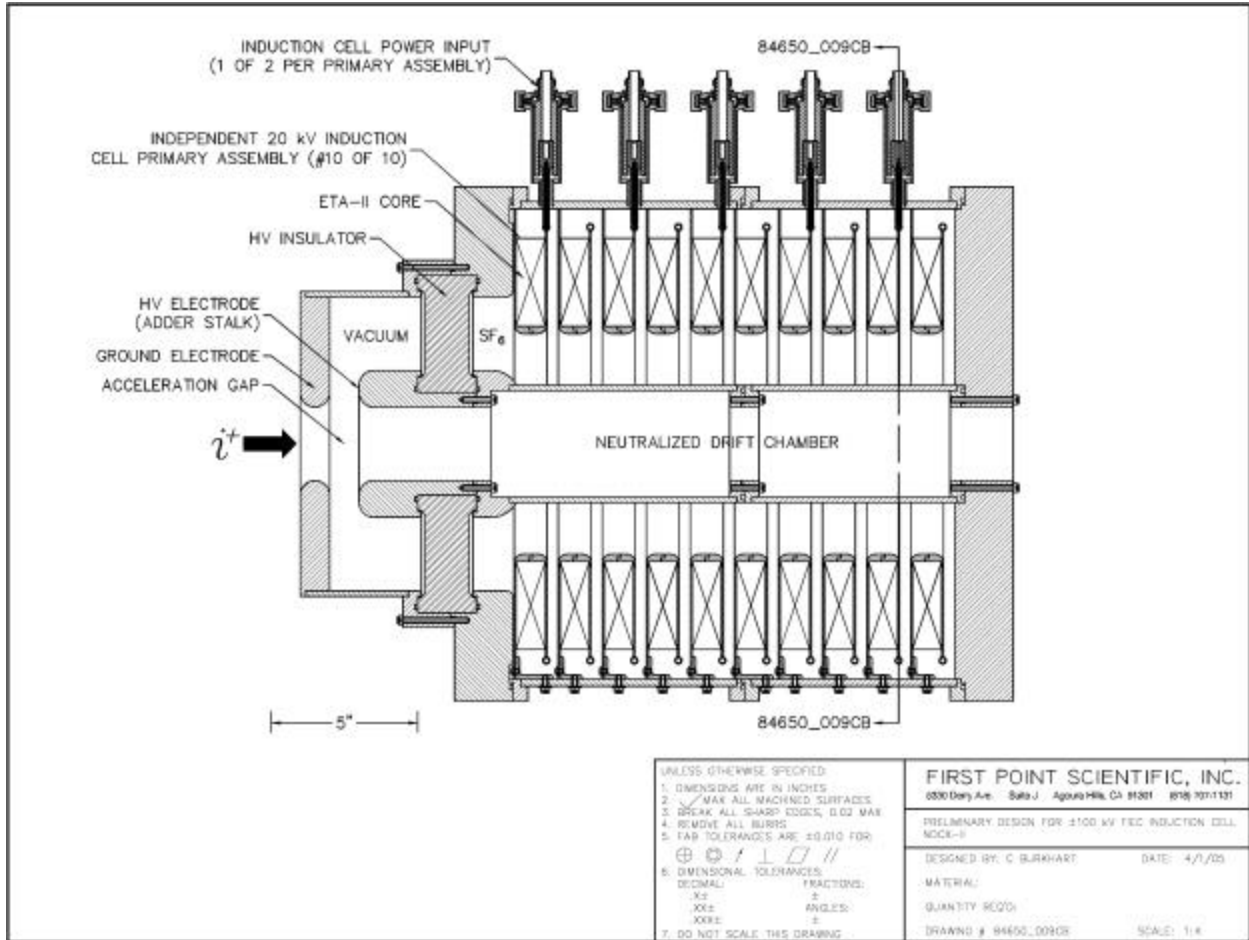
Sectional drawing (r-z plane) of the FIEC induction module.
